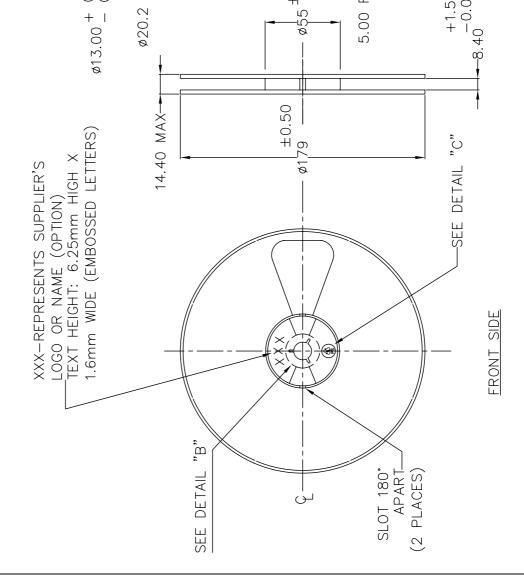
DFN6L (1.2 x 1 mm) reel information drawing (front view)
